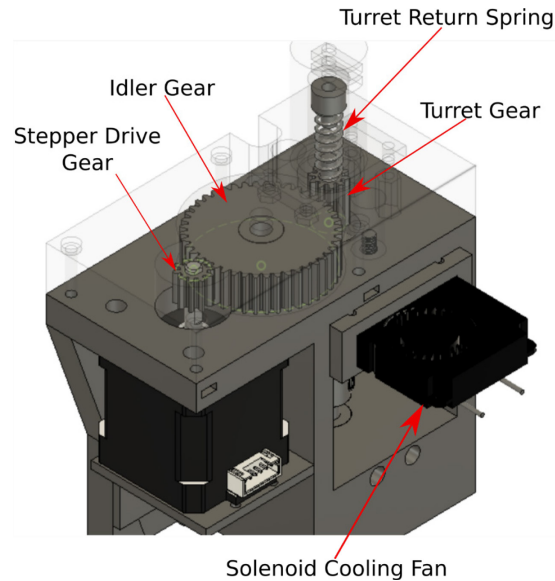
Top view of the VOE system showing geartrain, turret return mechanism, and cooling fan.
